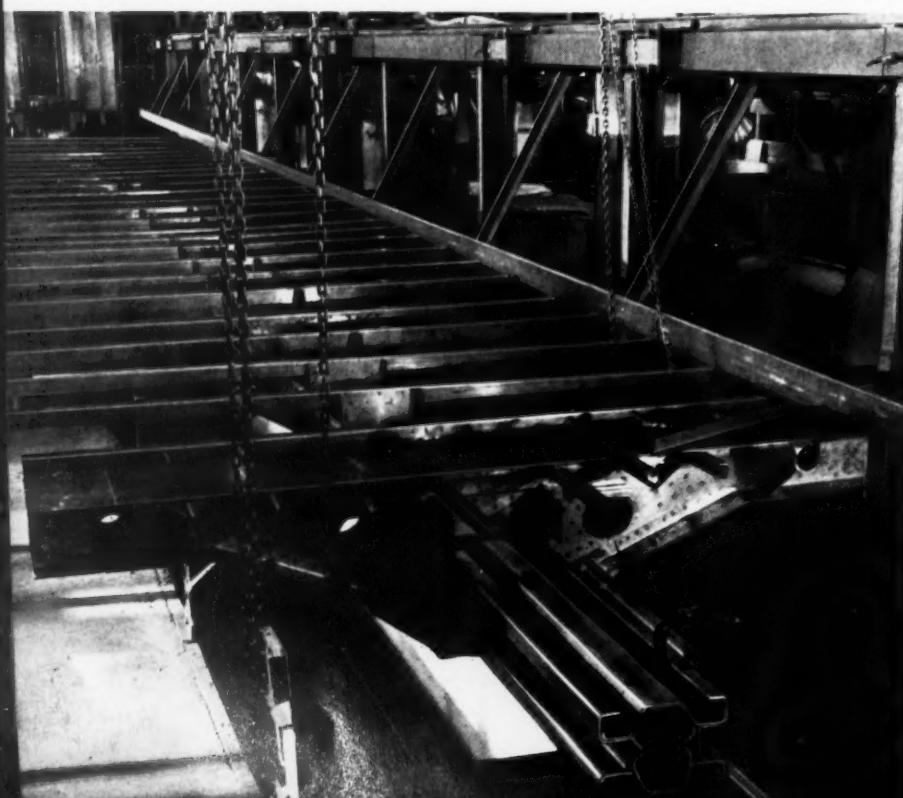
General Assembly Jig, Showing Construction of Center Sill, Bolster Beam, and Floor Beams on Budd Cars
